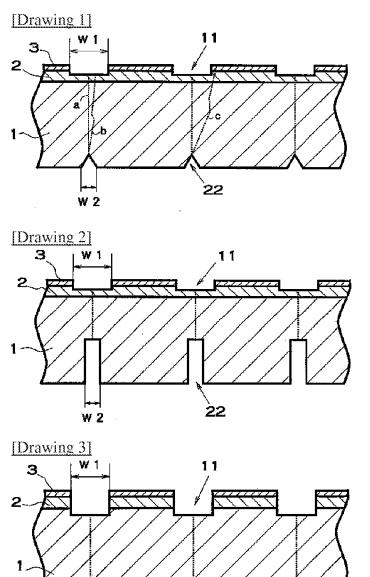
The  type sectional view explaining the process which separates a wafer.
